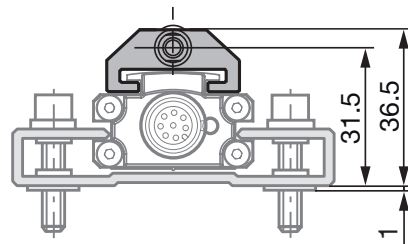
Dimensions and distances with BTL5-T-2814-1S magnet
